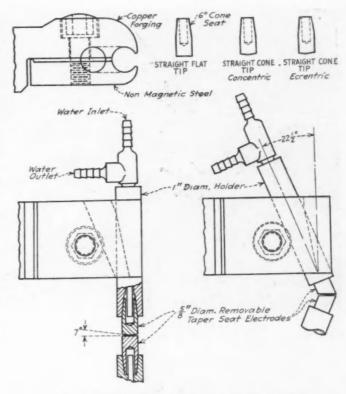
Spotwelding Tip Holder and Tip Assembly
